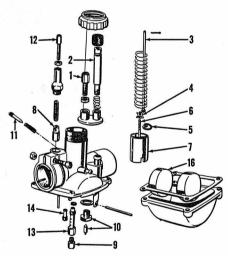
Exploded view of Mikuni carburetor used on all models.
